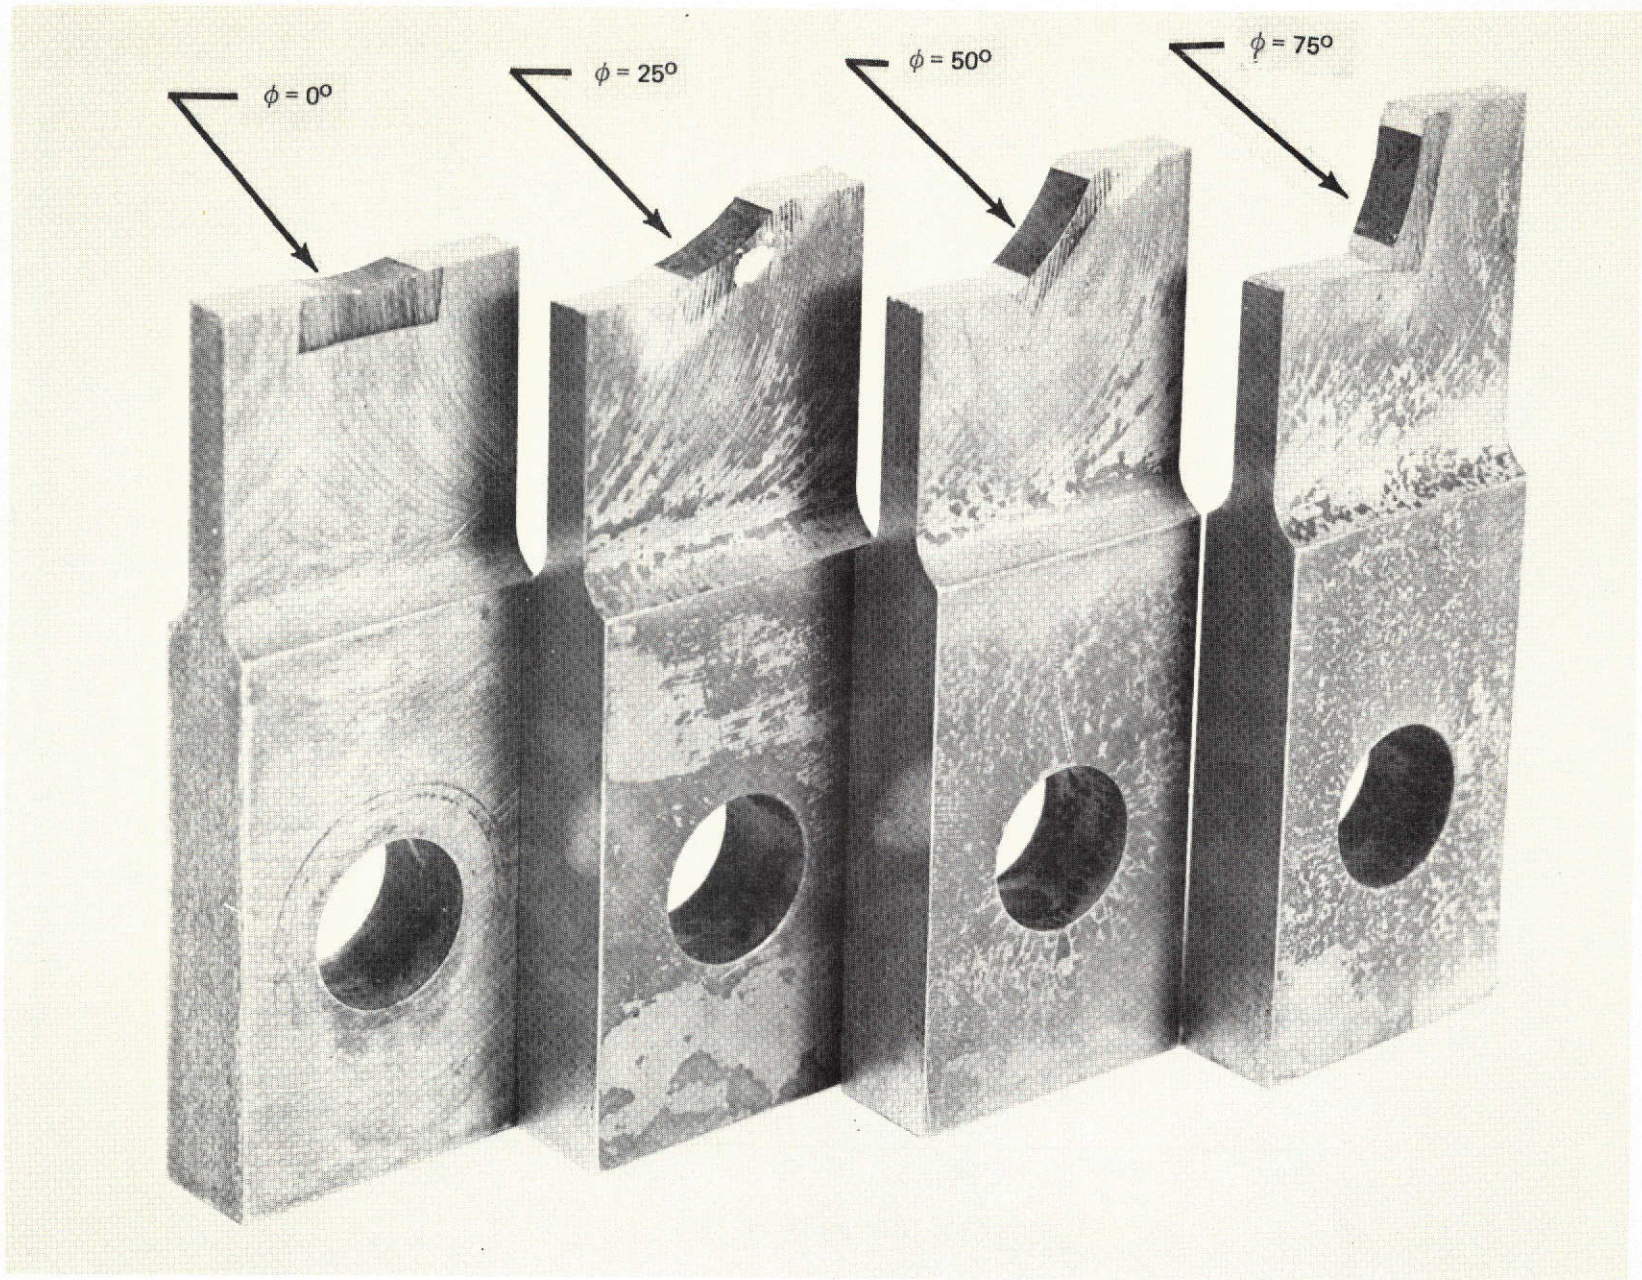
Fracture Surfaces of Inclined Center Cracked Specimens of 4340 Steel Subjected to Combined Modes I and II.
